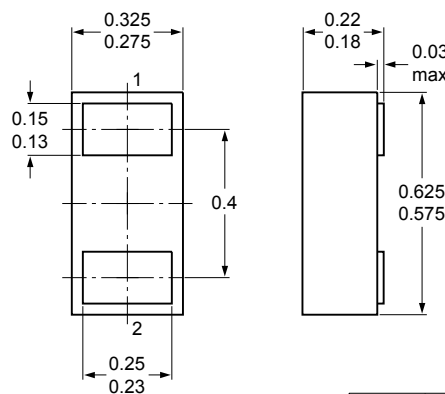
Package outline DSN0603B-2 (SOD962B)
